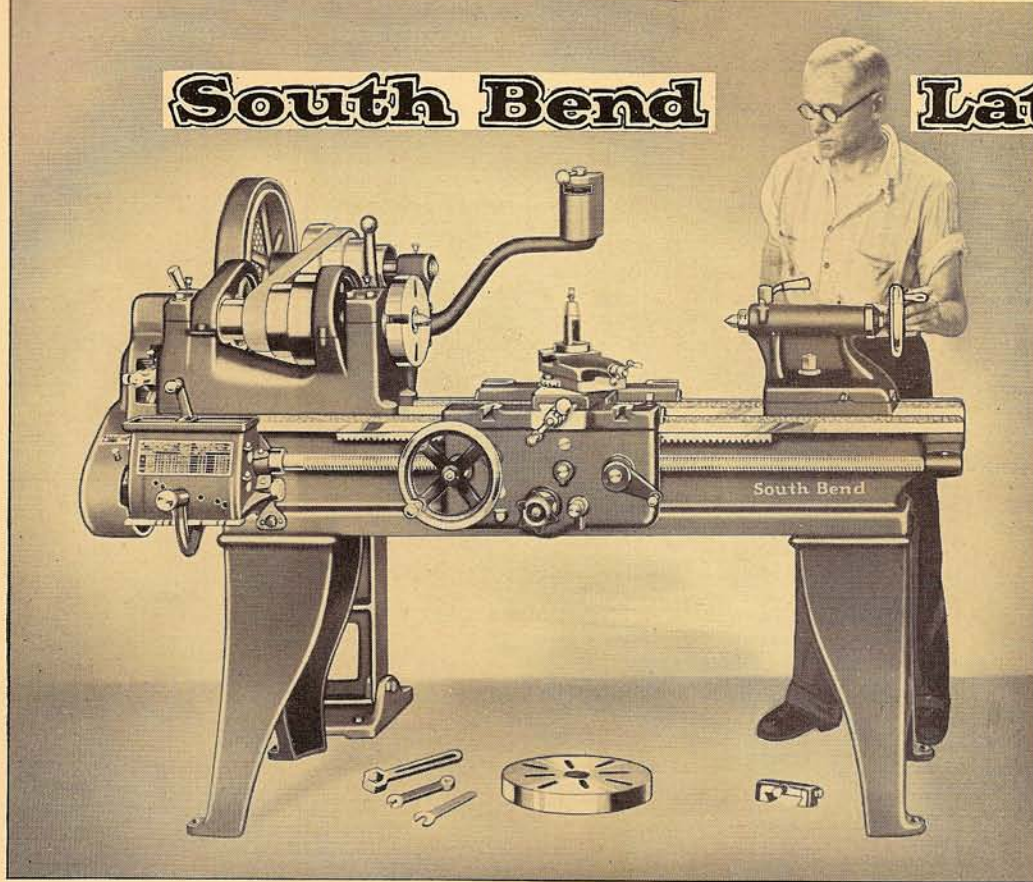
Cat. No. 917-C, 16" x 6' Quick Change Gear Pedestal Motor Driven South Bend Precision Lathe...\$863.00
